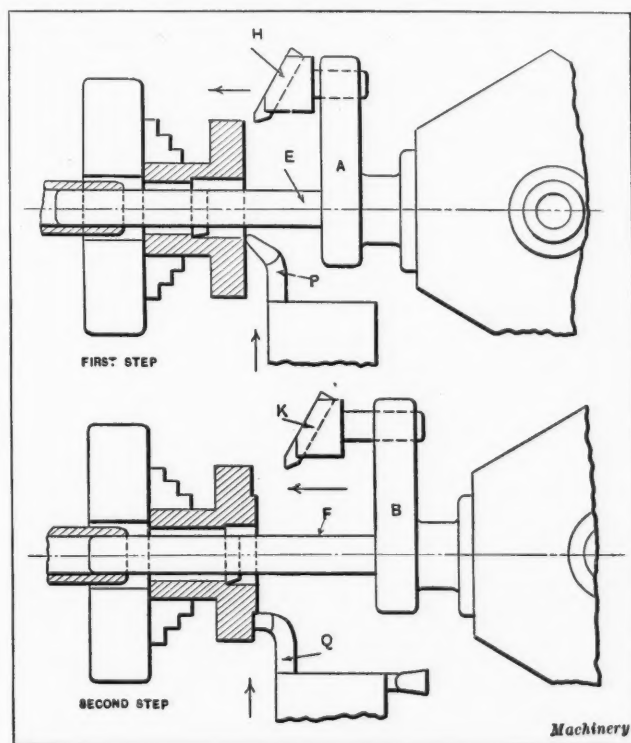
Two Steps in the Final Machining Operations on the Part shown at *A* in Fig. 1
